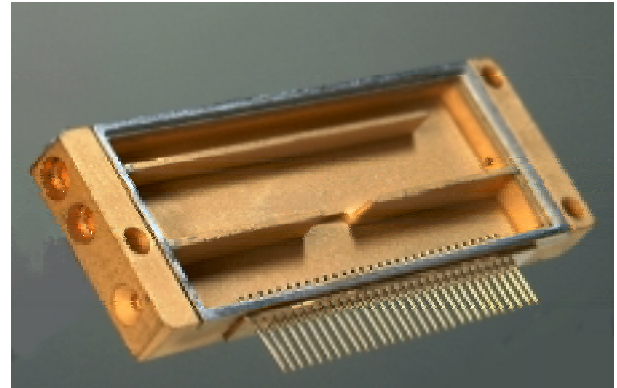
AlSiC housing with Brazed Seal Ring and 30 Pin Header Coaxial Feedthrus.
